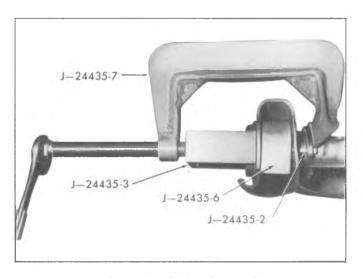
C-25--L.C.A. Rubber Bushing Removal
